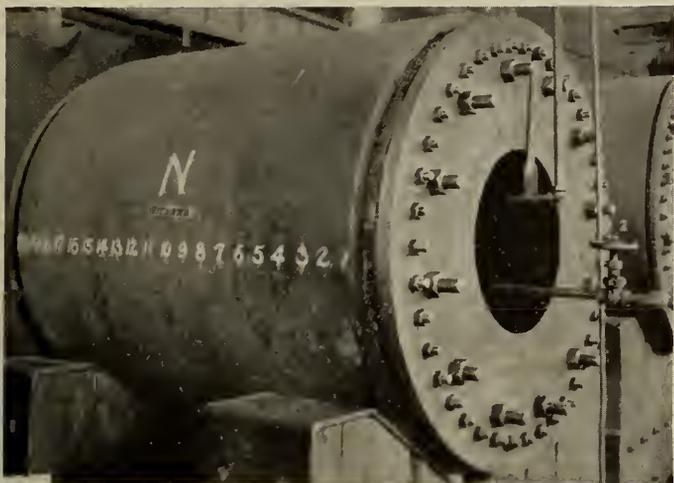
Welded Shell Fatigue Test Assembly.
